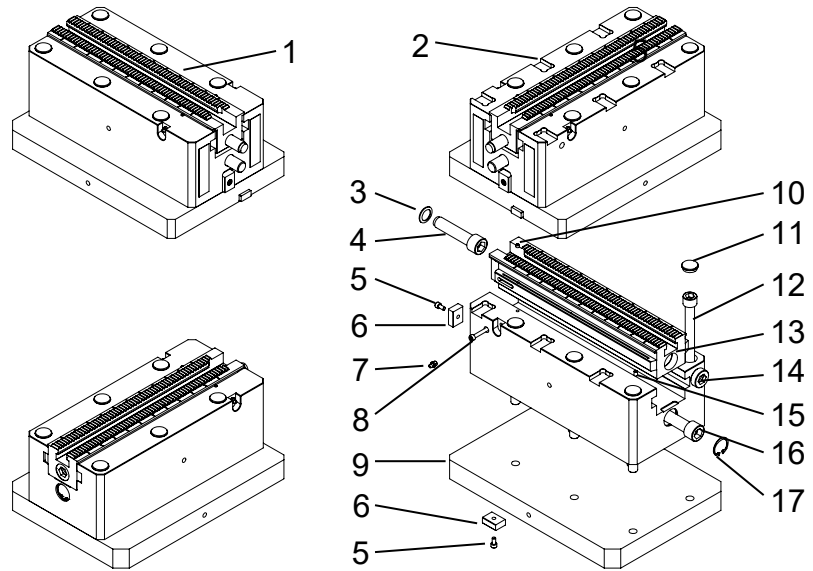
Spare parts InoFlex® extension kit VL140 - 200
